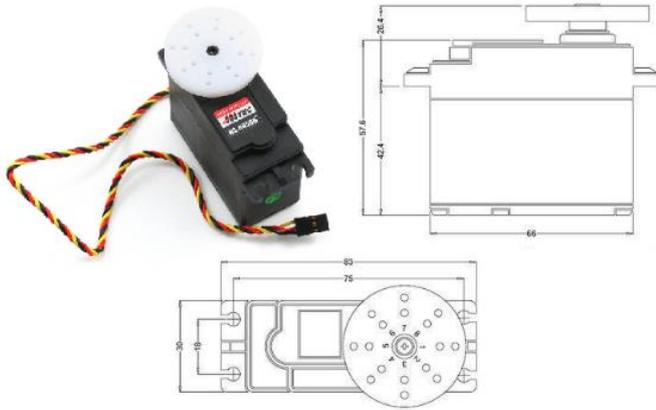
Real view of MG996 servo motor with its dimensions drawing
